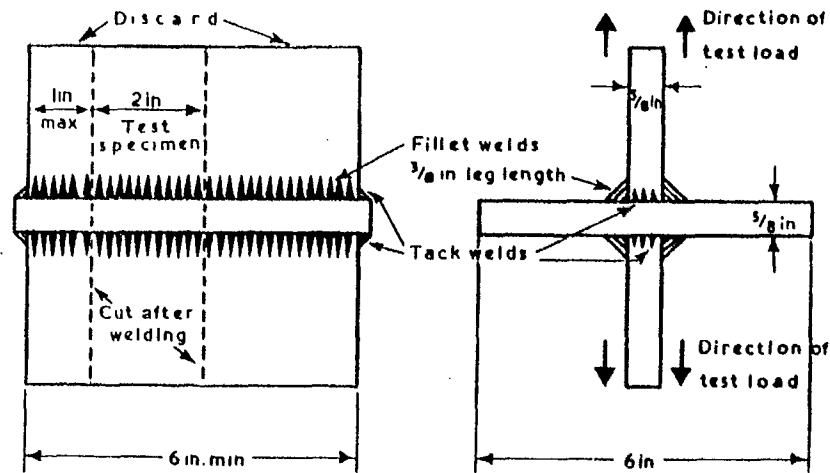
Double-fillet-weld tensile test assembly.
